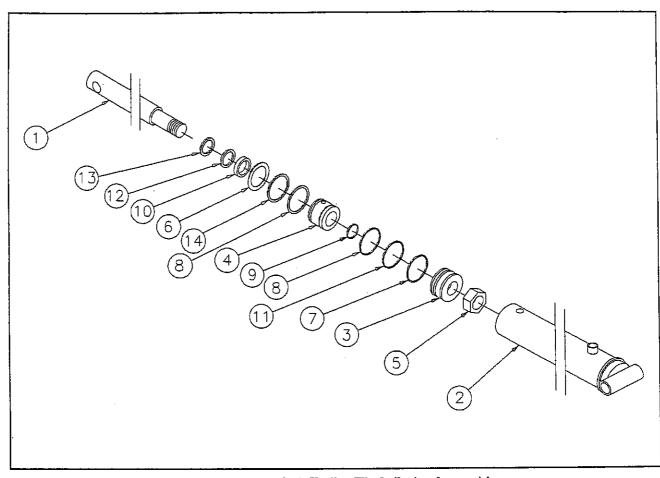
Pintle Hitch Trailer Tilt Cylinder Assembly
